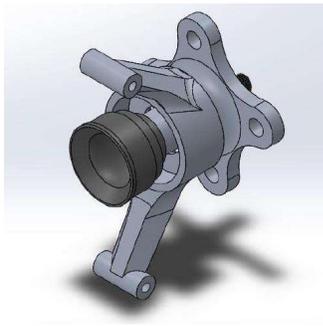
Isometric view of assembled Rear Wheel Assembly
